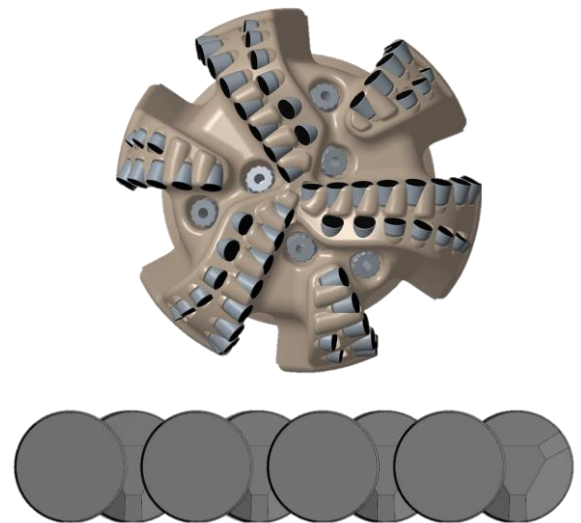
Bit design for Wujiaping formation with multi-faceted shaped cutter placement on bit blades
